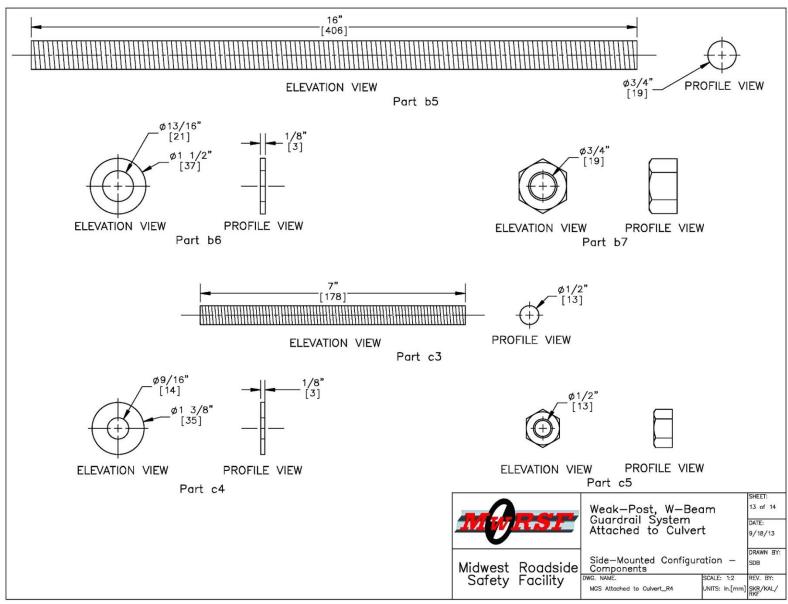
Side-Mounted Configuration, Attachment Hardware Details
